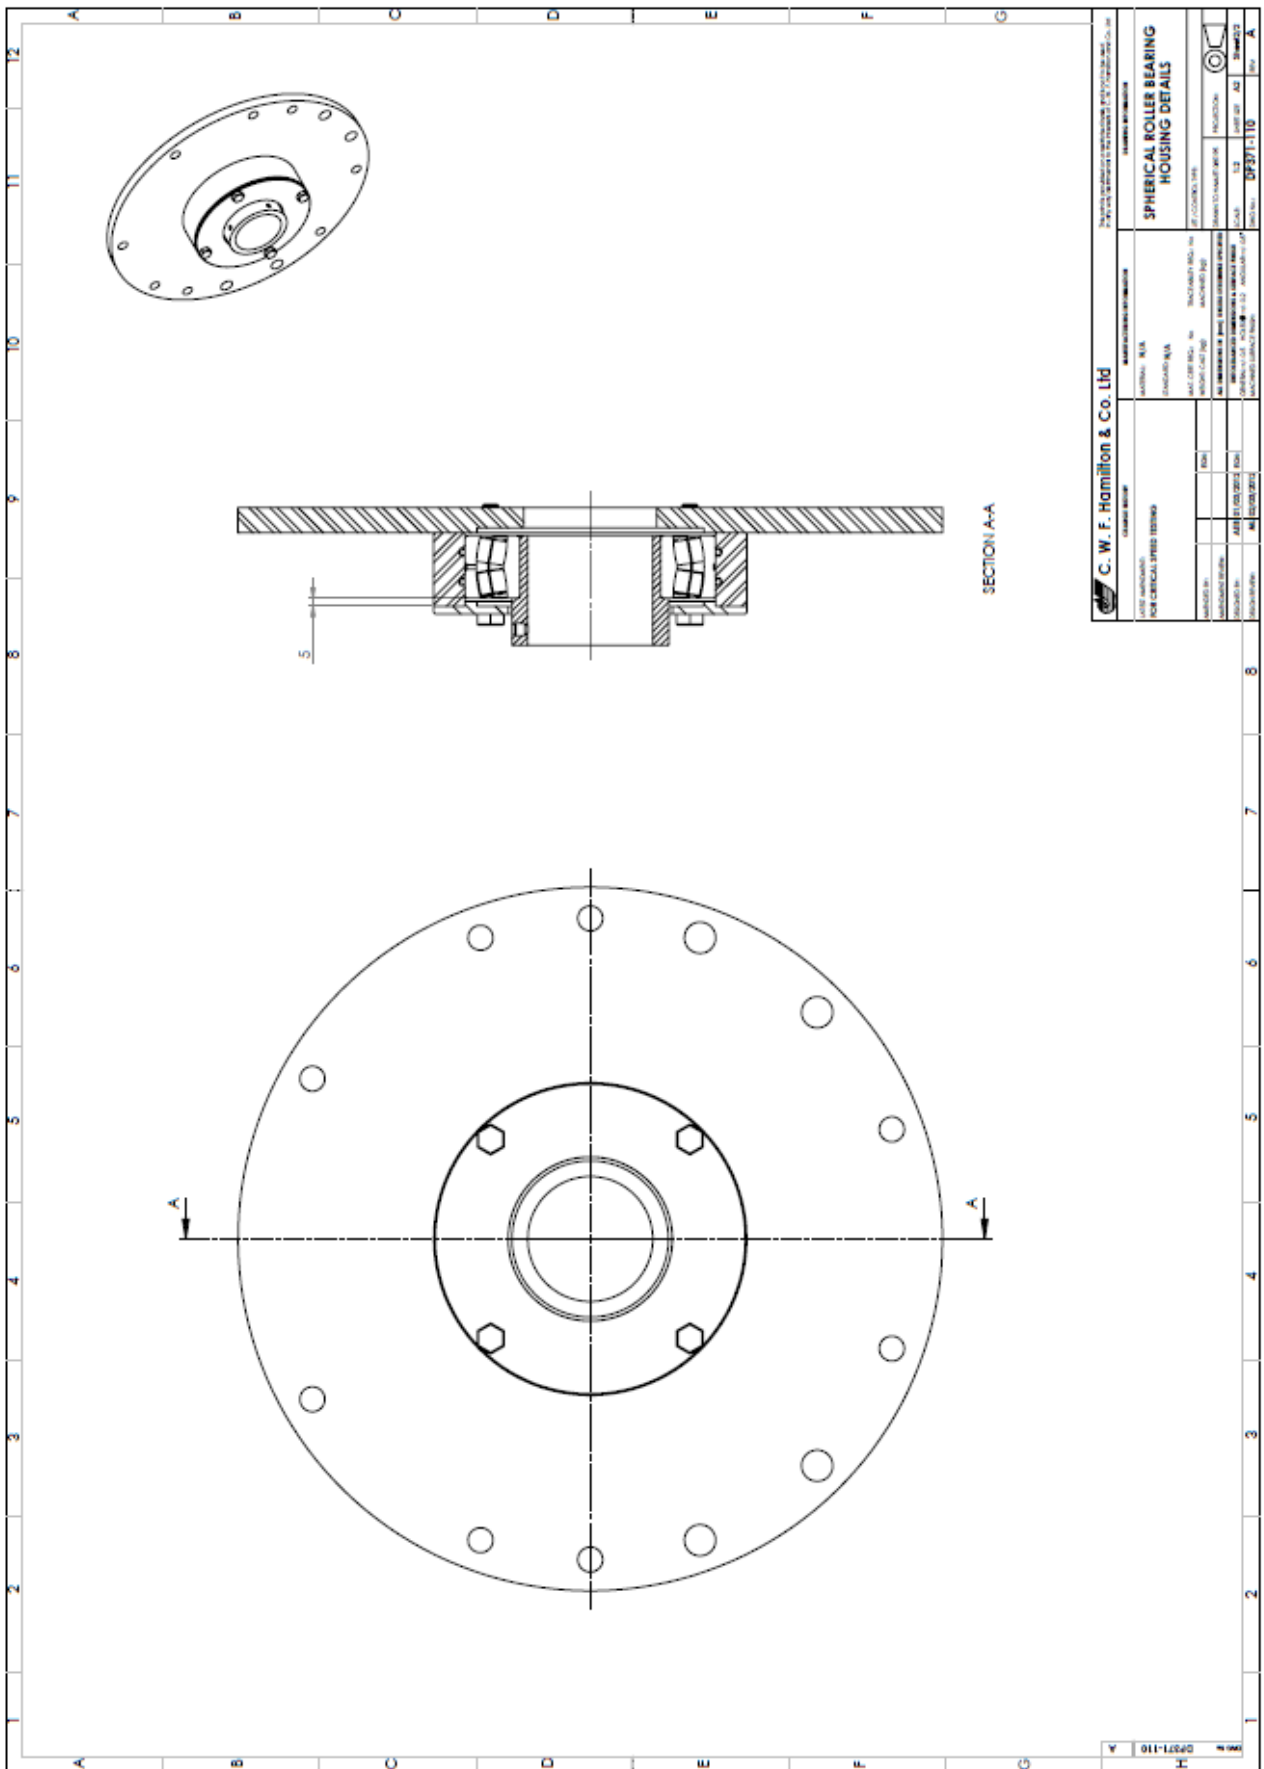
Assembled Spherical Bearing Housing Drawing
